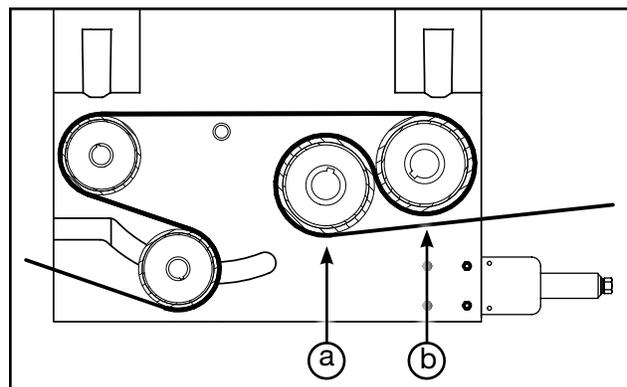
Drive Box, Pinch Roller (a) &amp; Drive Roller (b)
